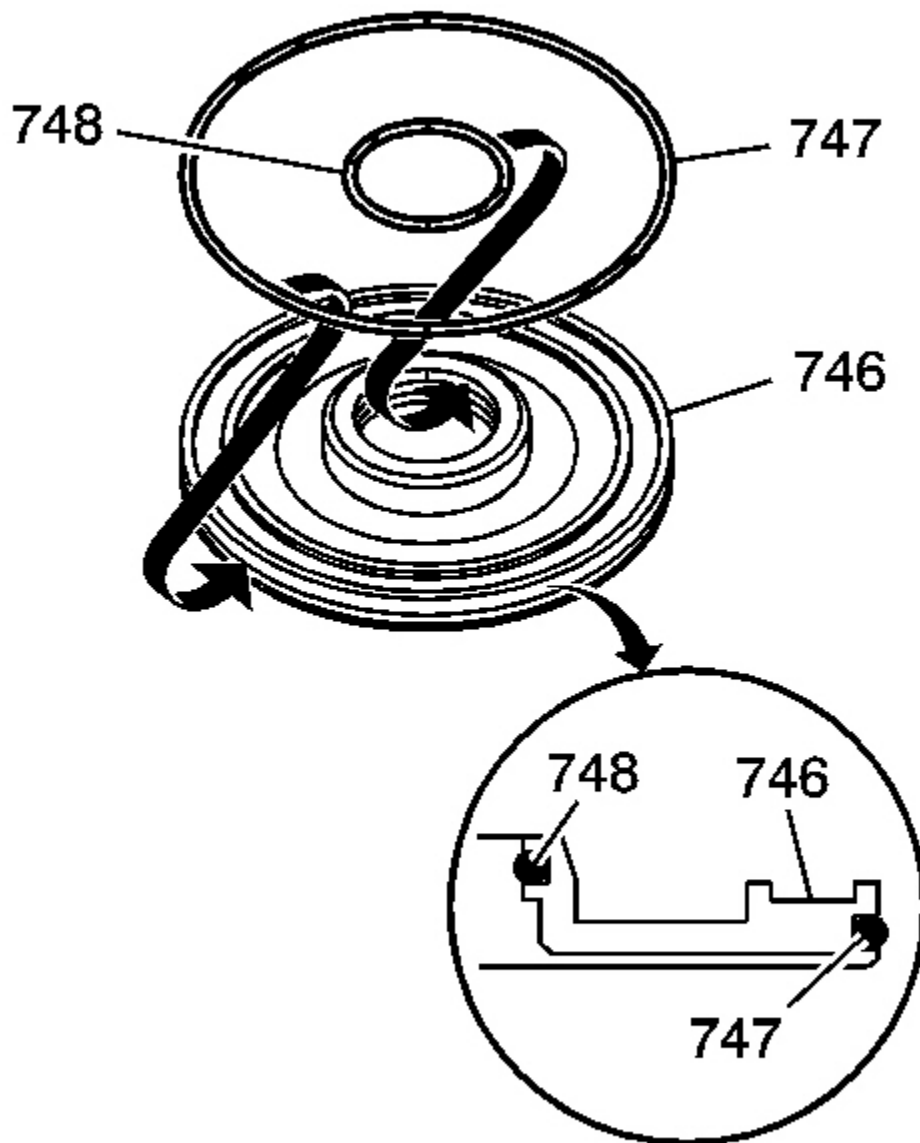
2nd Clutch Piston Inner & Outer Seal
